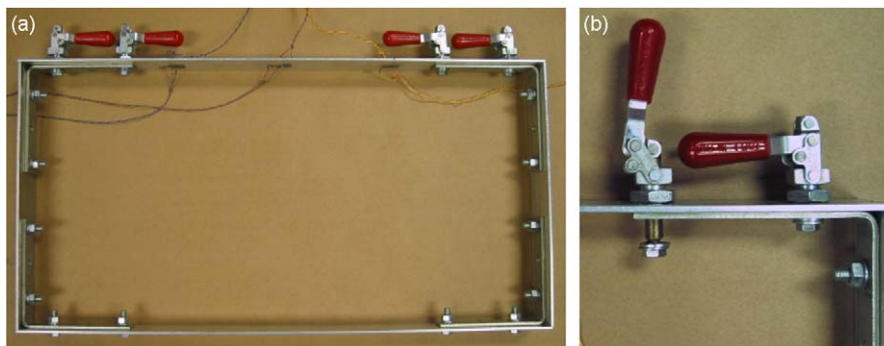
The completed frame structure (a) and clamping mechanism (b) are shown.
